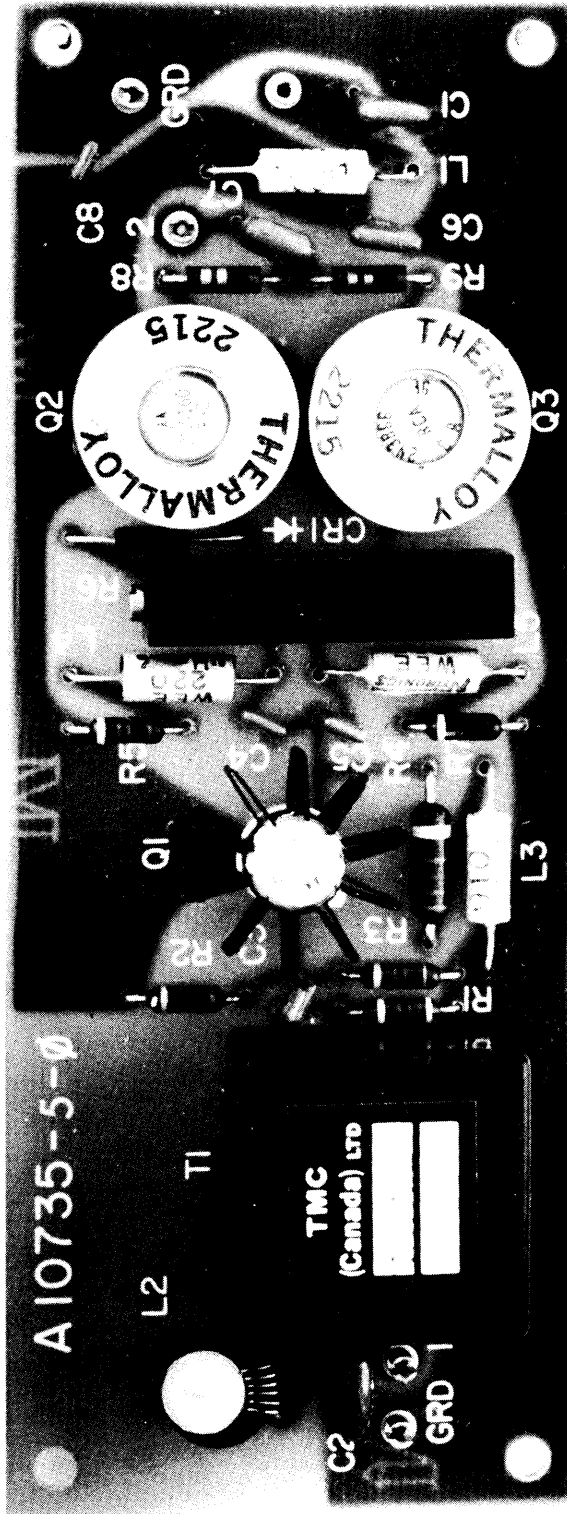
PREAMPLIFIER ASSEMBLY 1A3
